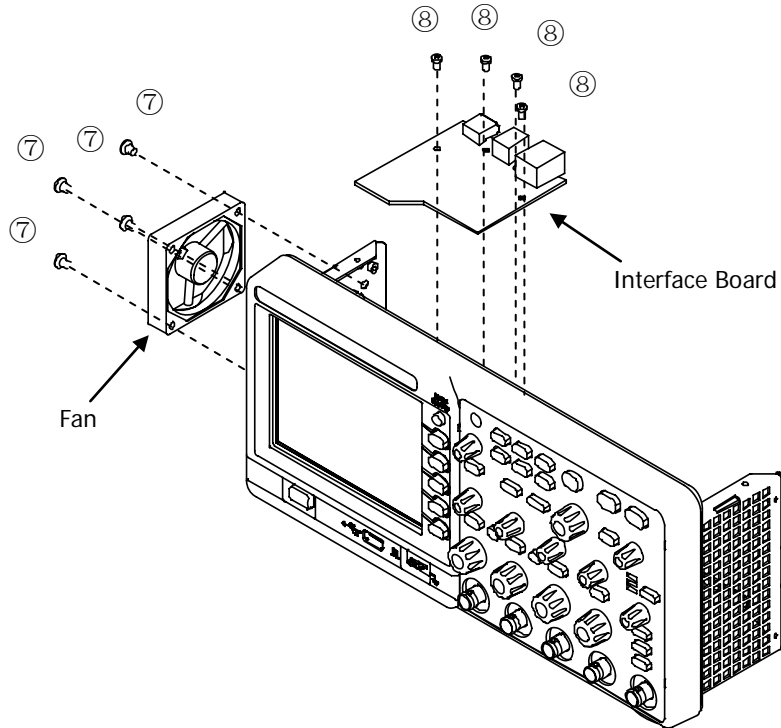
To Disassemble and Assemble the Interface Board and Fan
